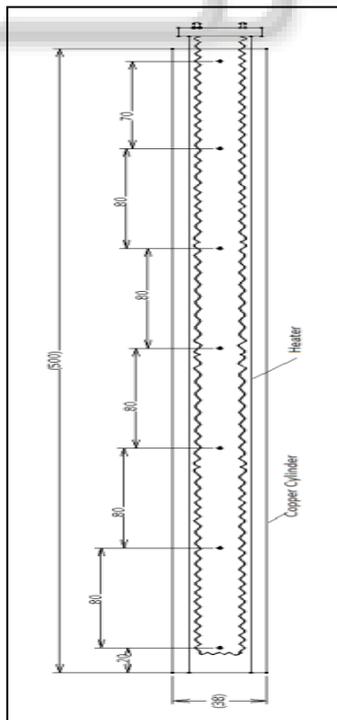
Heater assembly for vertical cylinder (Dimensions are in mm)
